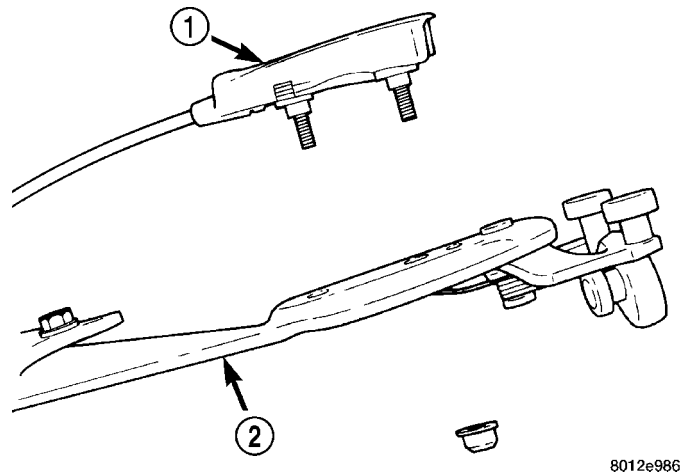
SLIDING DOOR HOLD OPEN LATCH
